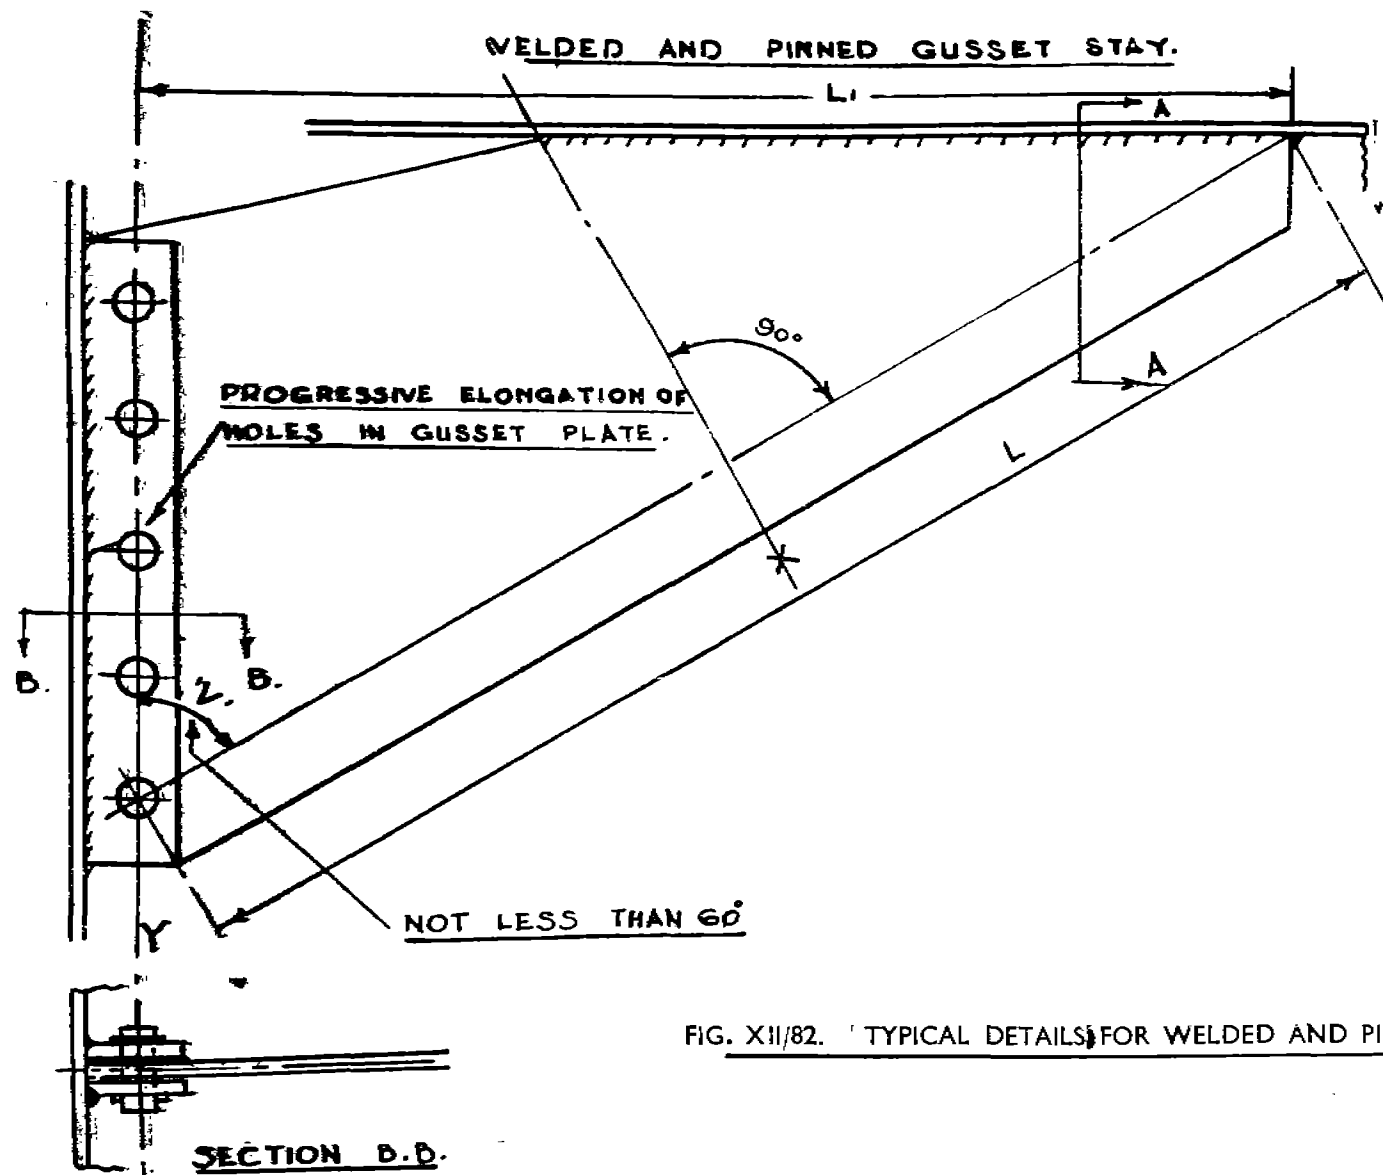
TYPICAL DETAILS FOR WELDED AND PINNED GUSSET STAY.
